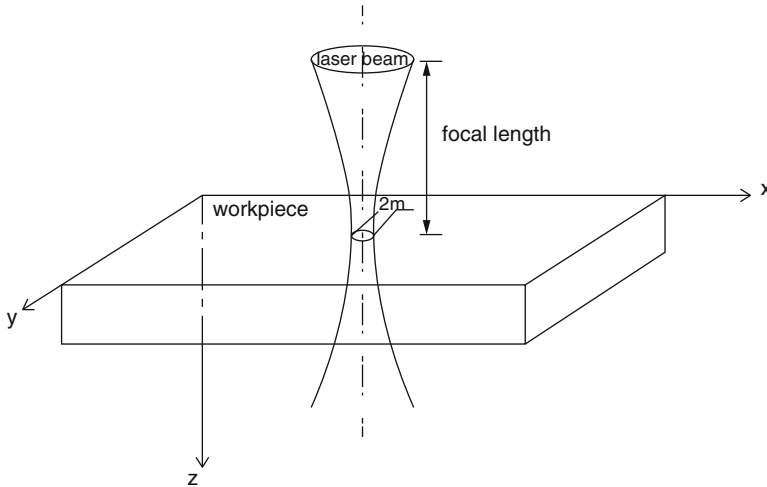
Schematic of laser beam impinging on a workpiece
